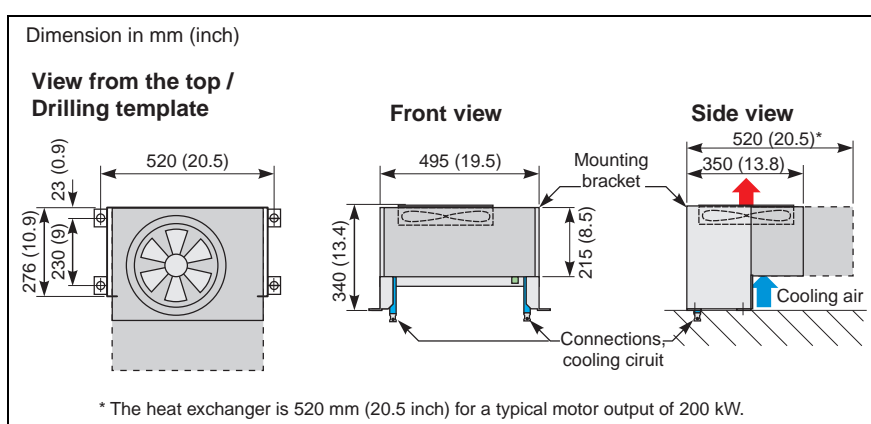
Dimension drawing heat exchanger for cabinet mounting, size class A and B
